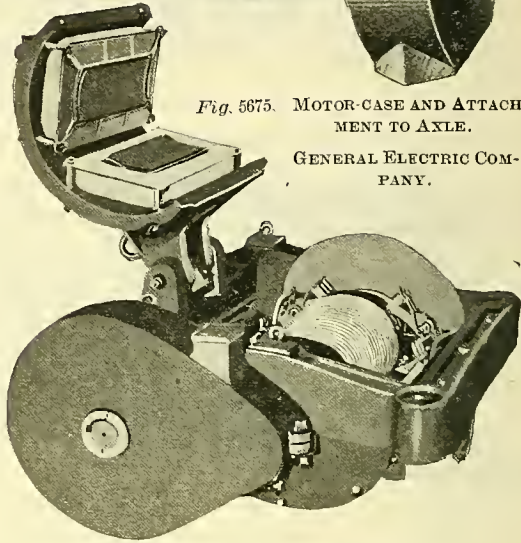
MOTOR-CASE AND ATTACHMENT TO AXLE.
